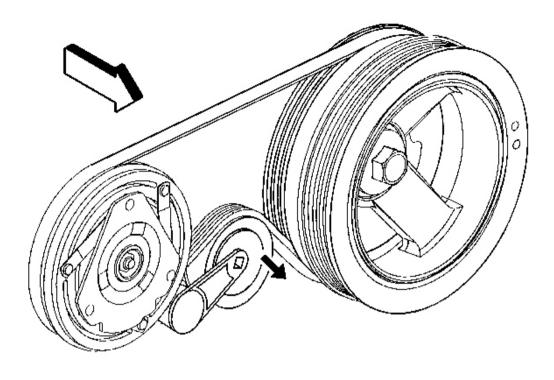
A/C Belt Tensioner Courtesy of GENERAL MOTORS CORP.
